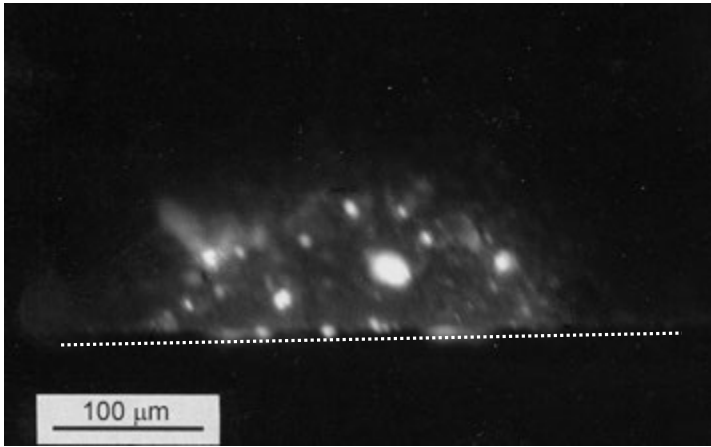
Fracture surface of a silicon nitride specimen with a Knoop semielliptical surface crack that was penetrated by a fluorescent dye prior to fracture. The dashed line is the specimen bottom surface. This photo was made with a compound microscope with xenon bulb illumination and a fluorescence filter at a nominal 200 X magnification. The dim blurred image is typical for the weakly-emitting dye penetrant. This photo was made with old style instant-developing film that was exposed for several minutes.
